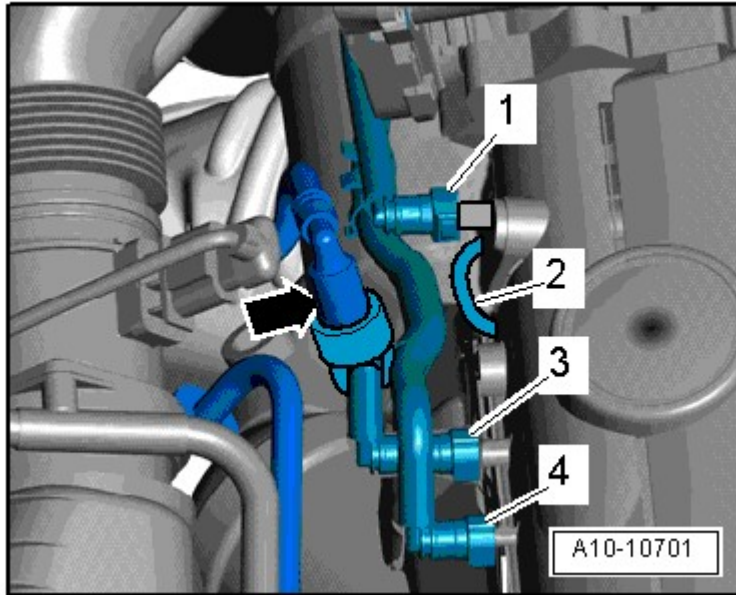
Identifying Vacuum Lines On Intake Manifold
